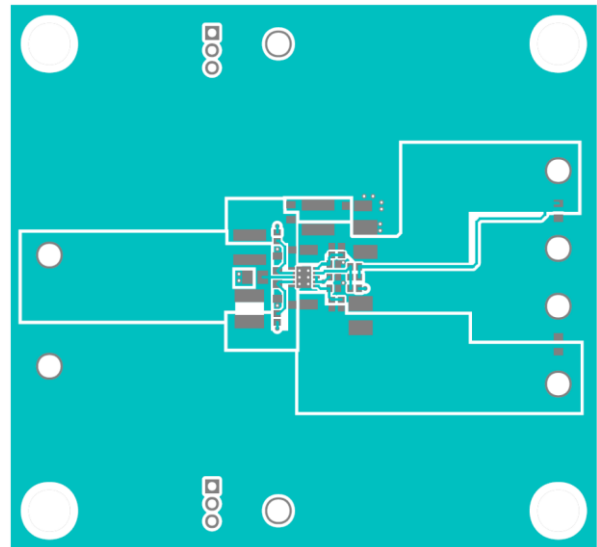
EVAL-ADPL31613-AZ PCB Layout—Layer 2
